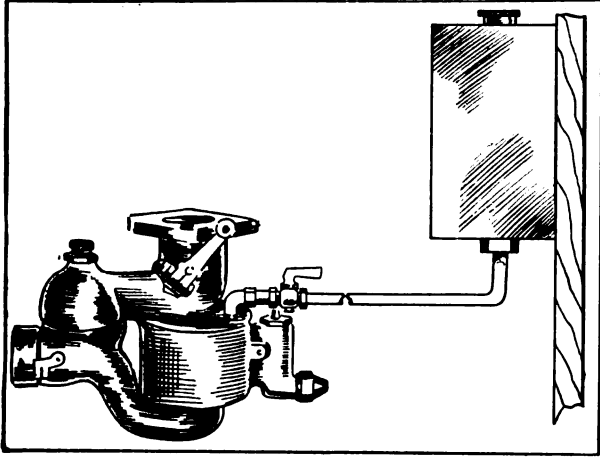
Suggestion of a Reader for Introducing Priming Fluid to the Float Chamber of Carburetor.
